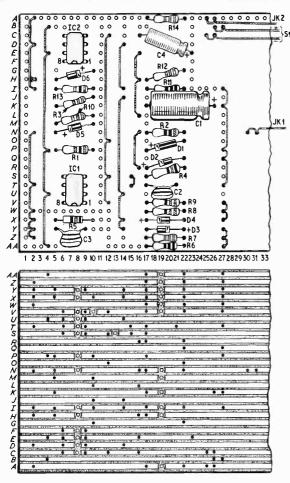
Component assembly and wiring details of Veroboard panel (Note that the copper strip should be cut at 19T)
